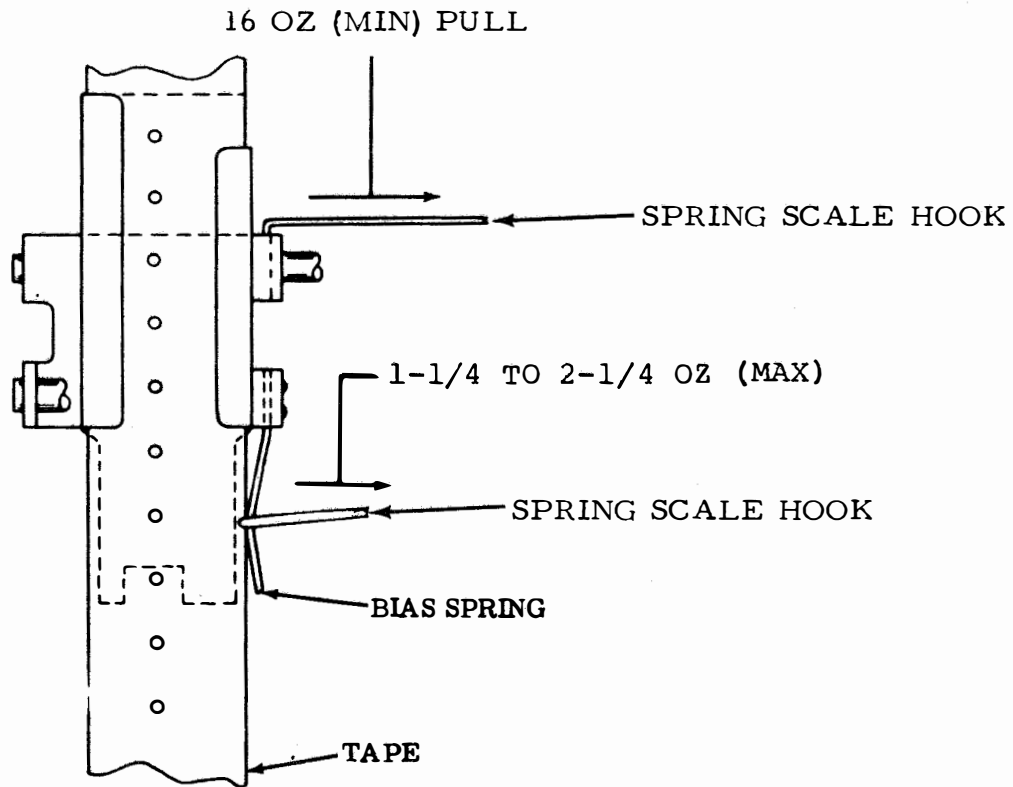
Bias Spring (Tape Chute) and Tape Guide Assembly Spring (For Chadless Tape), Top View
